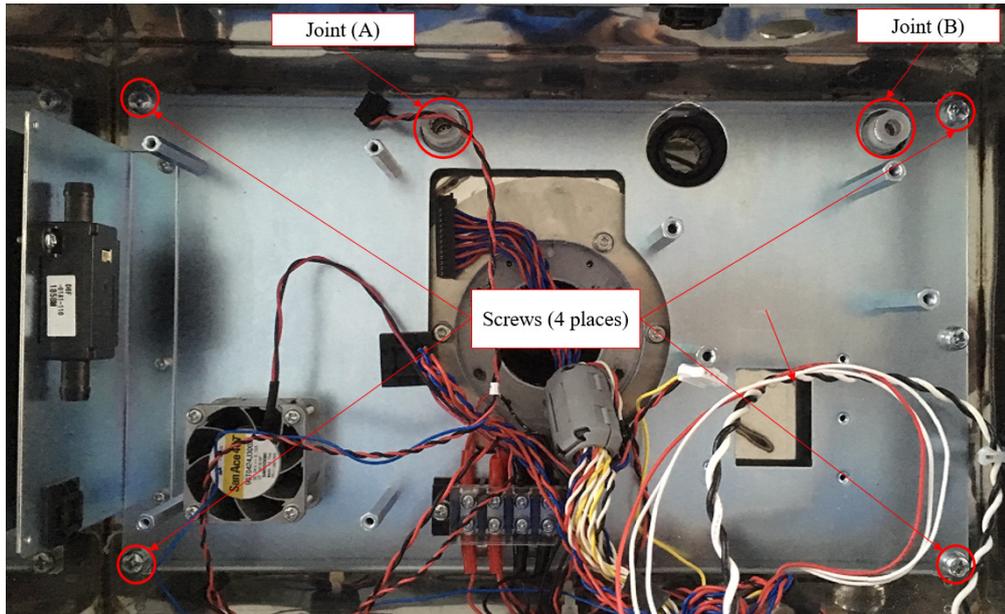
Remove the screws (4 points) with the screwdriver.
